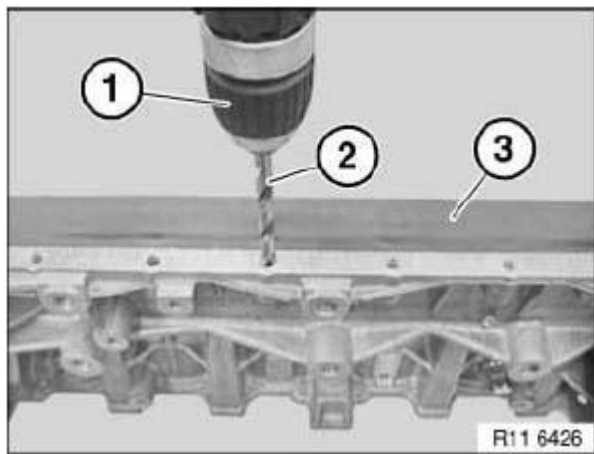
Identifying Core Drill Bit, Hand Drill And Clean Area
